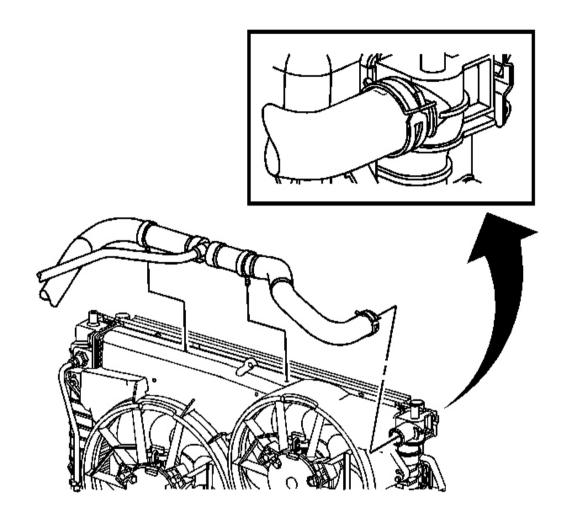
View Of Radiator Hose Courtesy of GENERAL MOTORS CORP.
